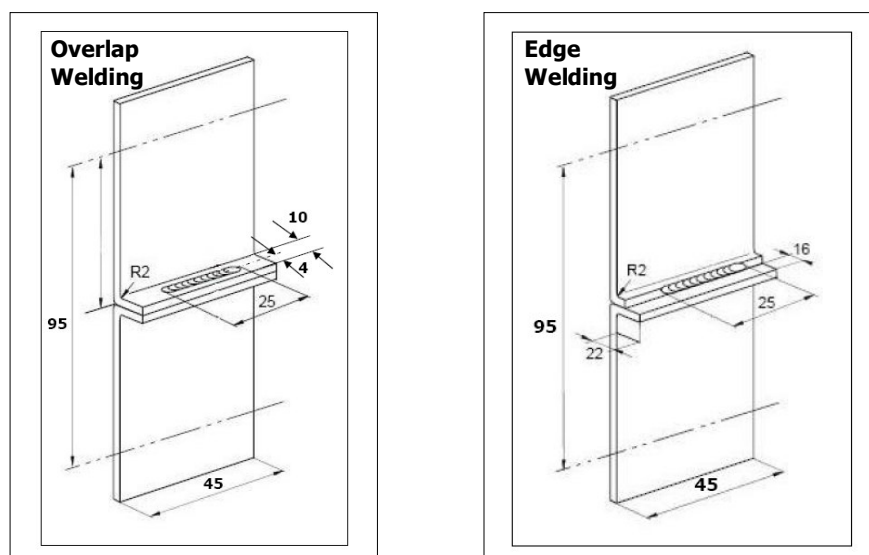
Typical Peel Test Specimen for Edge and Overlap Welds
